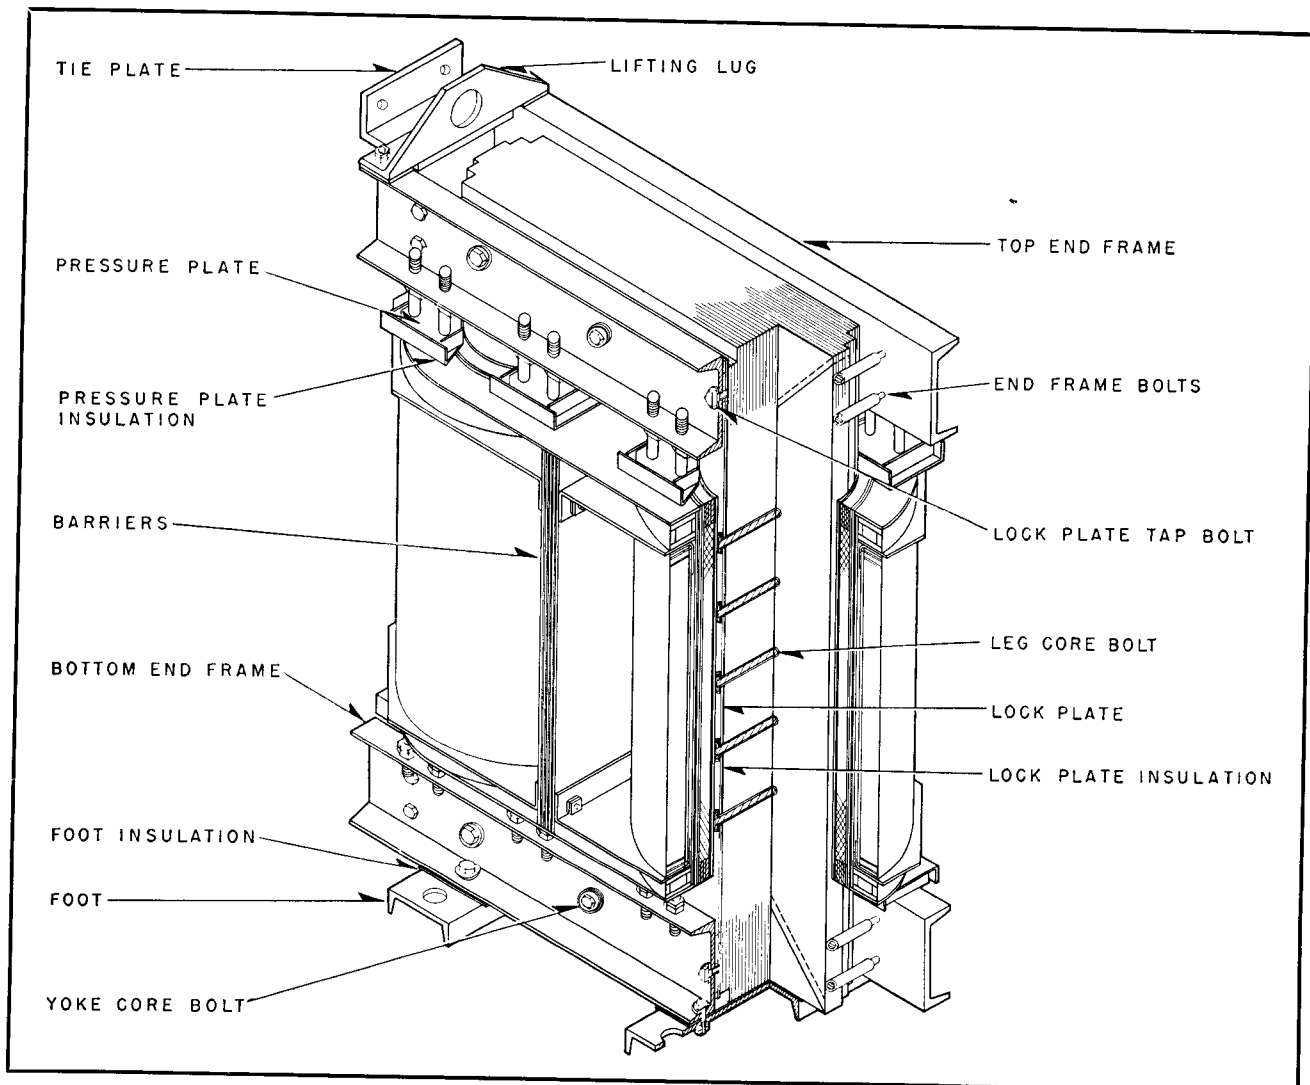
Sectional View of a Single-Phase Core Form Transformer
